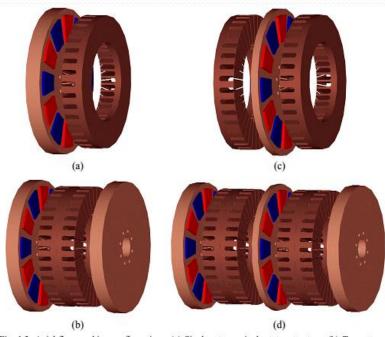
Axial-flux machine configurations. (a) Single-rotor - single-stator structure. (b) Two-rotors single-stator structure. (c) Single-rotor - two-stators structure, called hereafter also as AFIPM machine (Axial-Flux Interior rotor Permanent-Magnet machine). (d) Multistage structure including two stator blocks and three rotor blocks.
